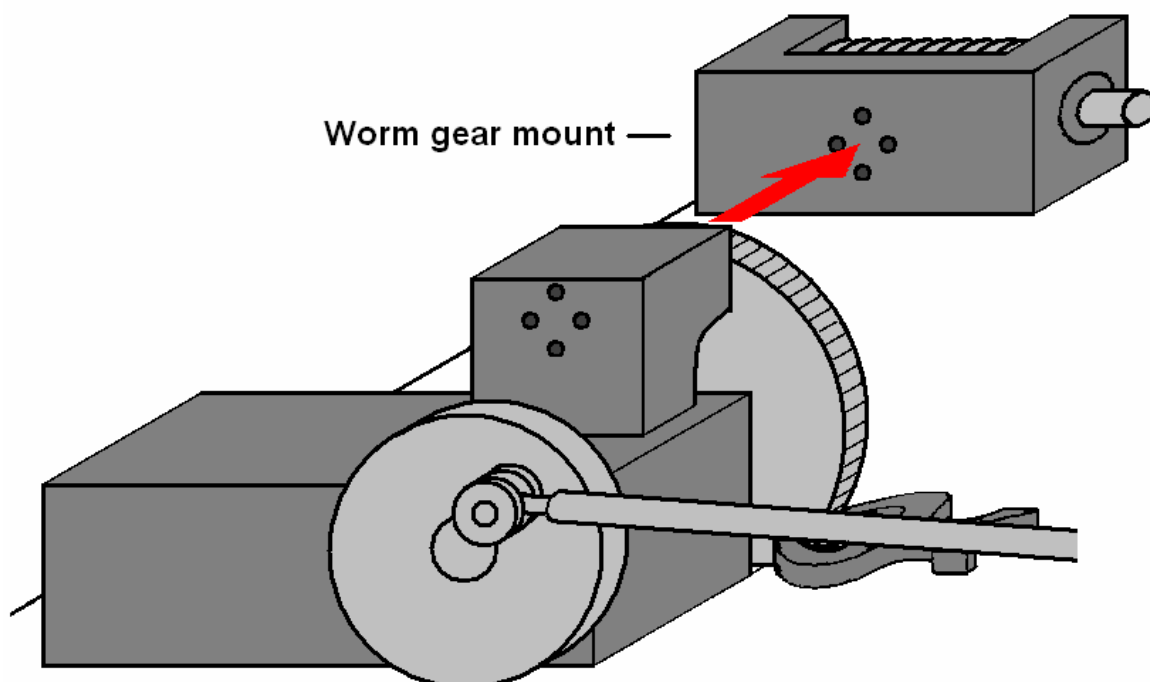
Removing the worm gear mount, after the screws have been removed.
